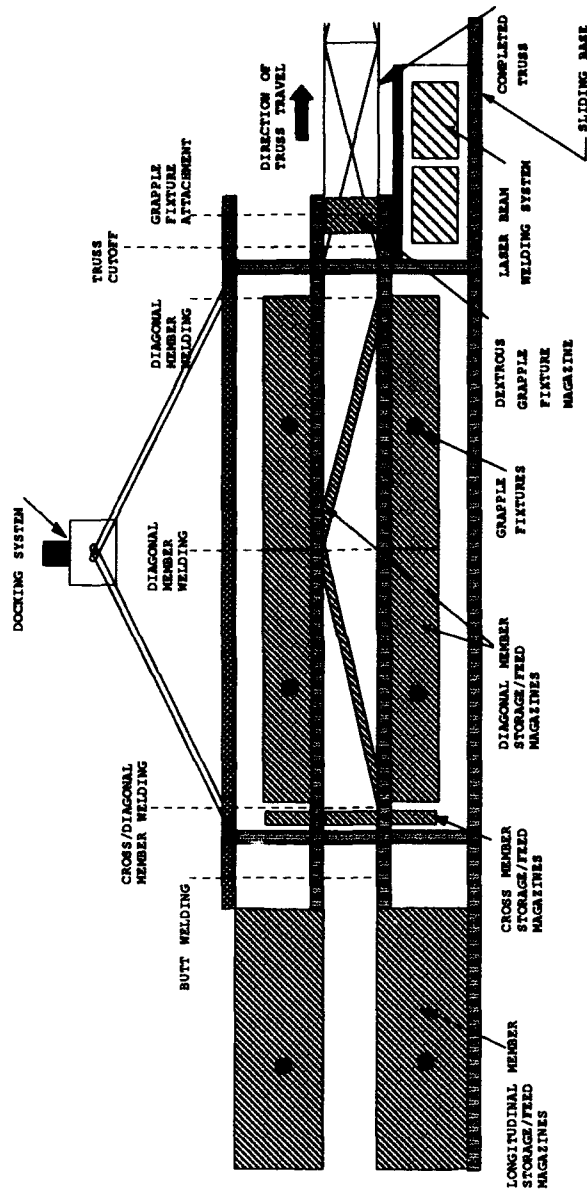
The SFP truss maker automatically fabricates continuous square trusses.
